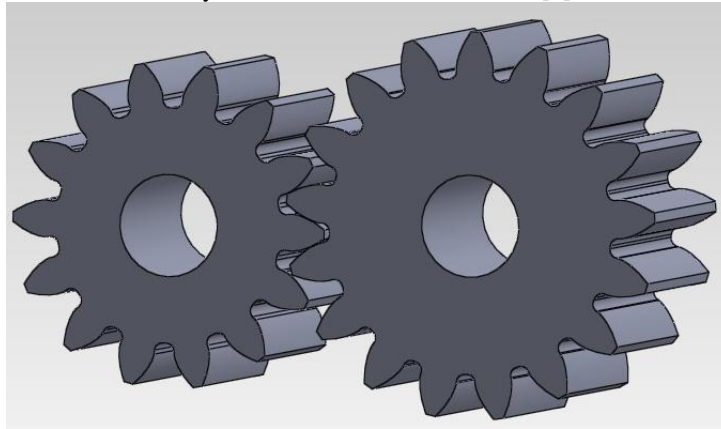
Assembled solid model of 25° Involute Spur gear pair
